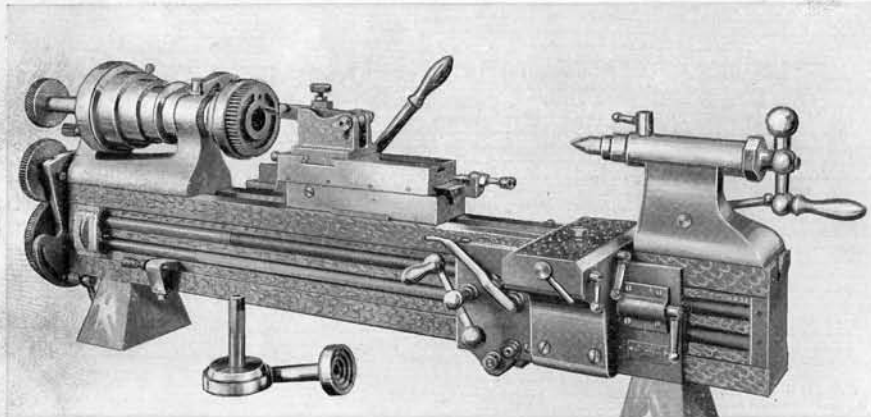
Rivett 608 (4 N.S.) lathe with Slotting Attachment mounted on base of Cutting-Off and Forming Slide cutting keyway in ar. Work held in step chuck. Foreground view, step chucks
